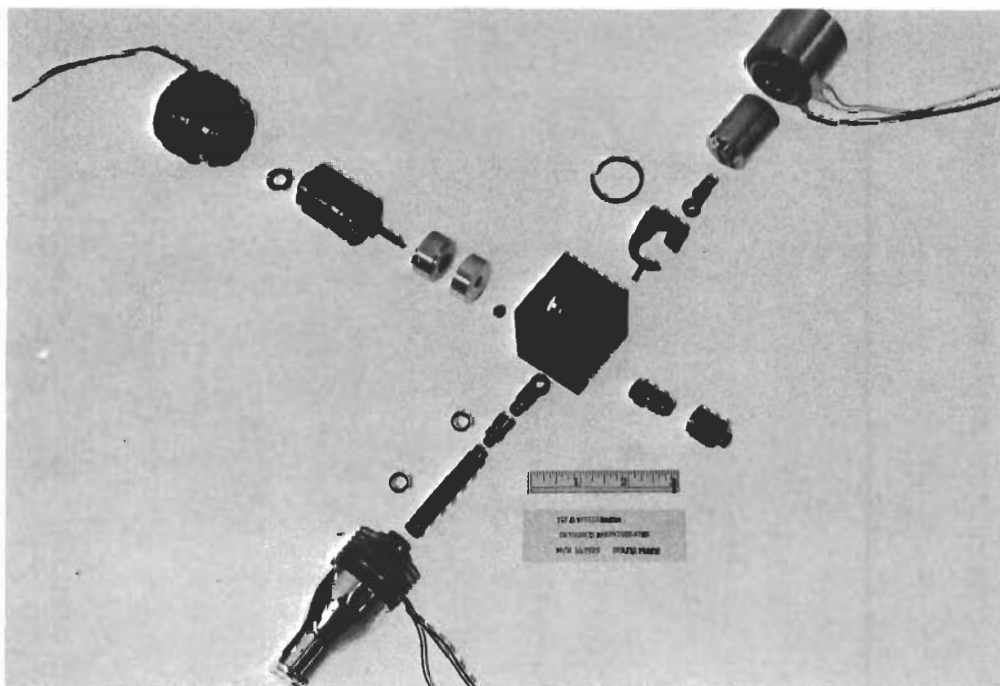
77°K Vuilleumier cryogenic refrigerator, P/N 447525, detail parts (HAC photo 5R00175)
